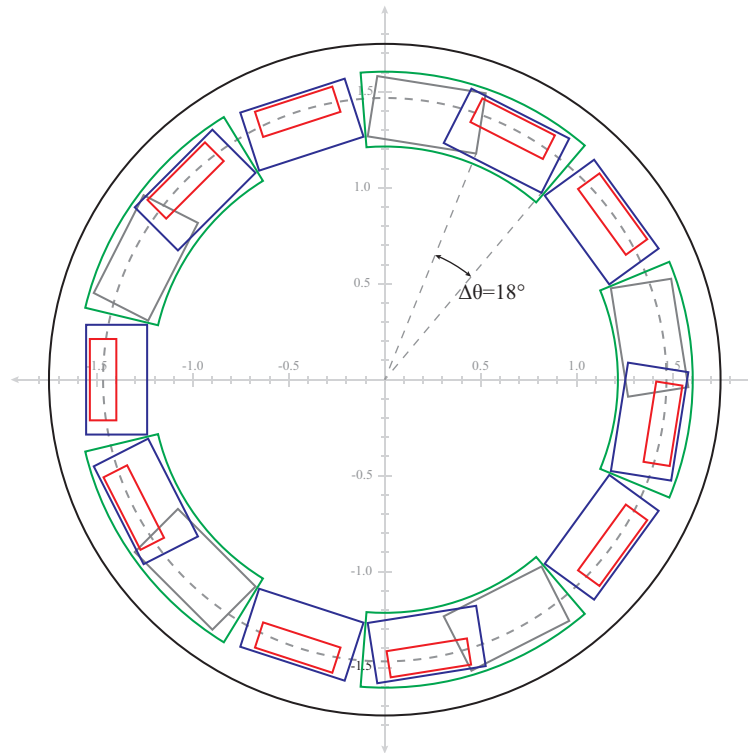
The brake calliper layout for Svendborg brakes' DEB-0120-004-DA-MAR. The red square marks the brake pads. The blue square marks the envelope of the brake callipers. The green ring sections represent the field occupied by the callipers throughout the stroke. The black circle marks the maximum size of the mechanism, as stated in product requirements.
